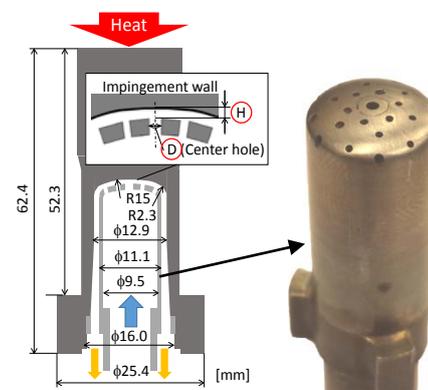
Cross-sectional view and inner cartridge of HEMJ test section
